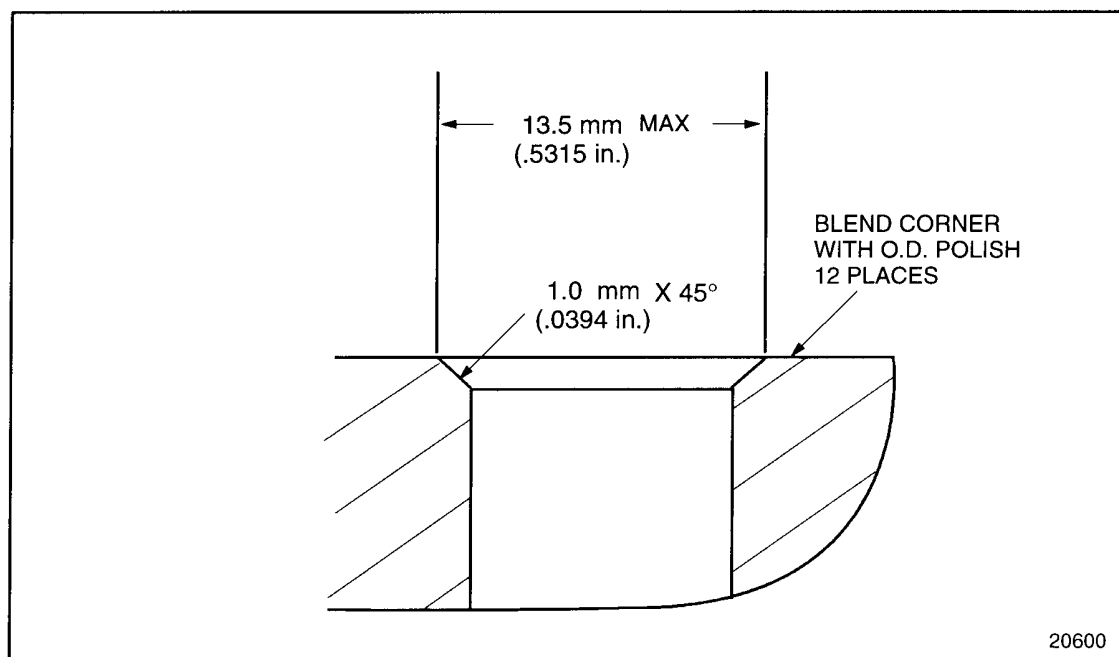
Main Journal Oil Hole Chamfer Limits
